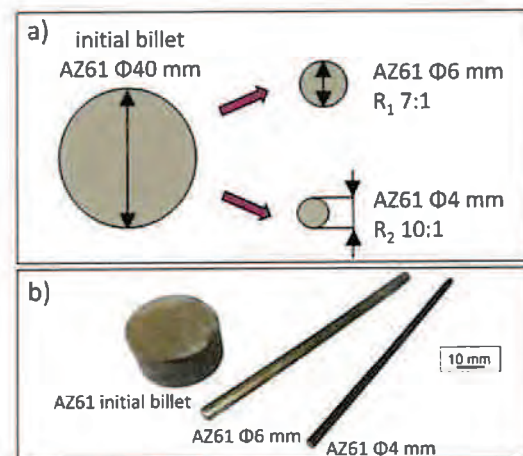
Details of KoBo extrusion applied to the investigated materials: a) initial and final dimensions of the AZ61 rods extruded under various extrusion ratios, b) real life images of the extruded rods.
